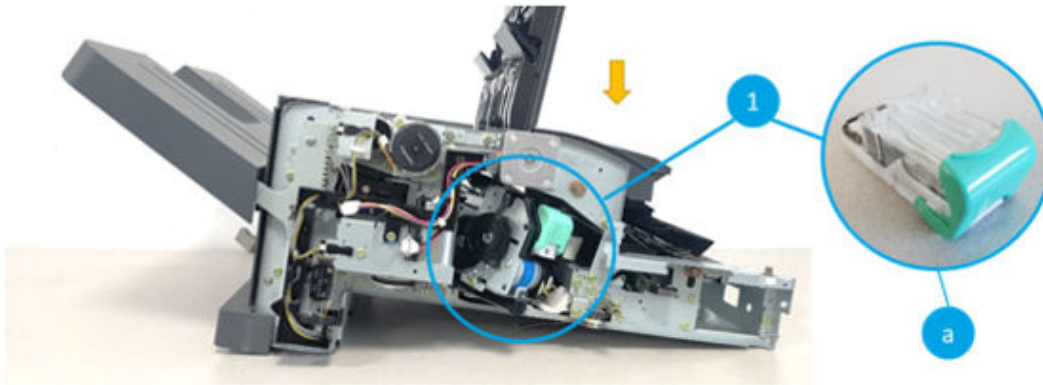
Inner finisher system - stapler unit detail view (2/2)
